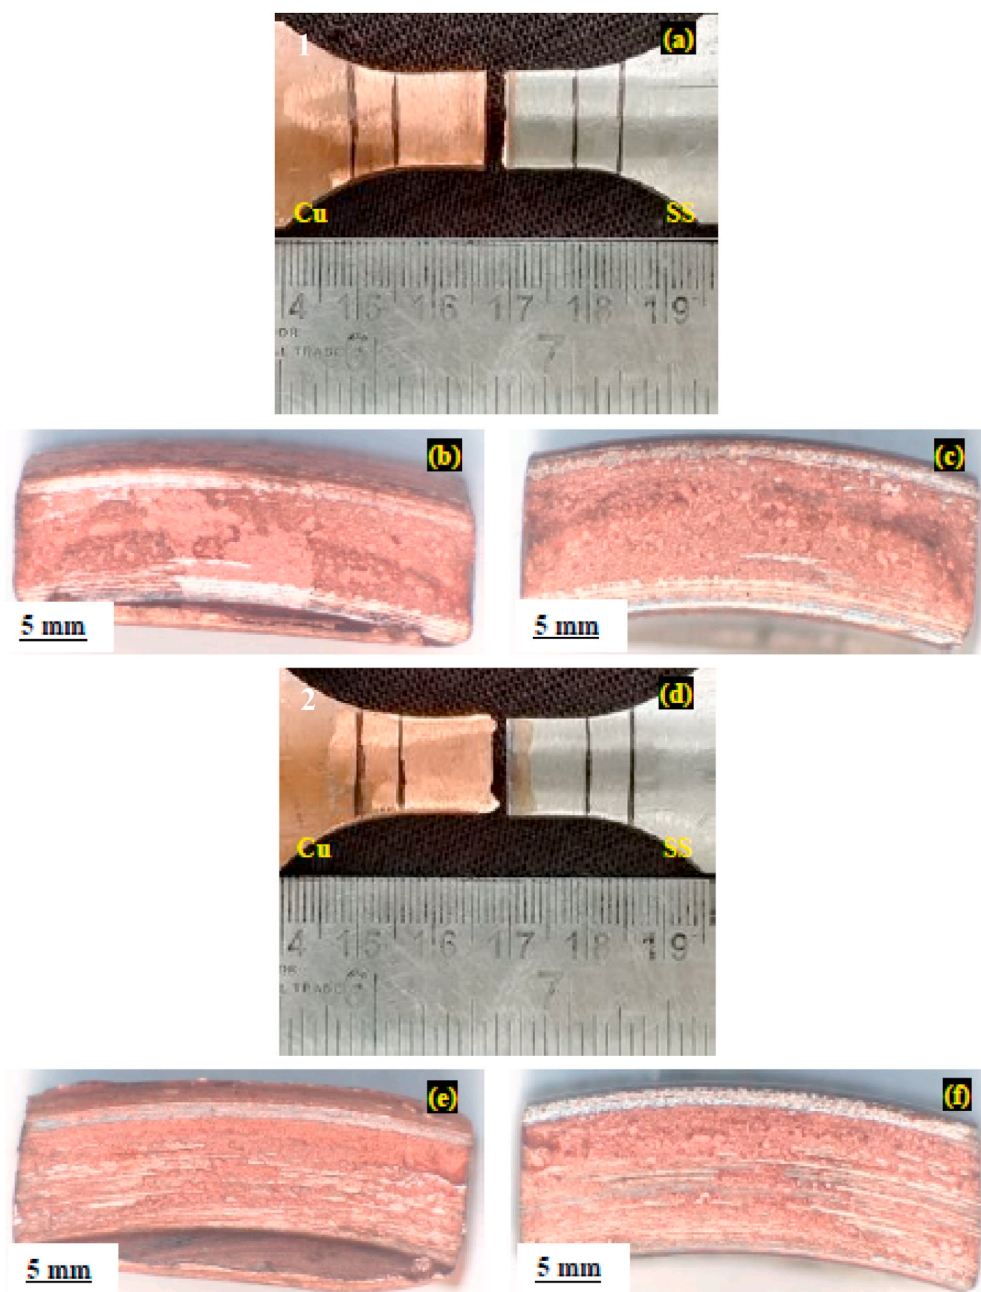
Fracture location after tensile testing and fracture surface images at a macroscopic level for weld made by friction time of 15 s. (a) broken tensile specimen (tensile specimen 1), (b) fractured surface of Cu side for broken specimen shown in (a), (c) fractured surface of SS side for broken specimen shown in (a), (d) broken tensile specimen (tensile specimen 2), (e) fractured surface of Cu side for broken specimen shown in (d), (f) fractured surface of SS side for broken specimen shown in (d).
